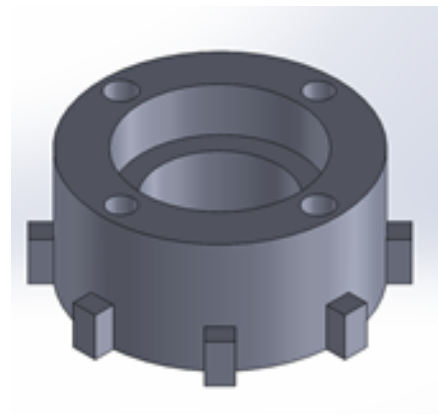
CENTREPIECE (BIRDS EYE VIEW)
